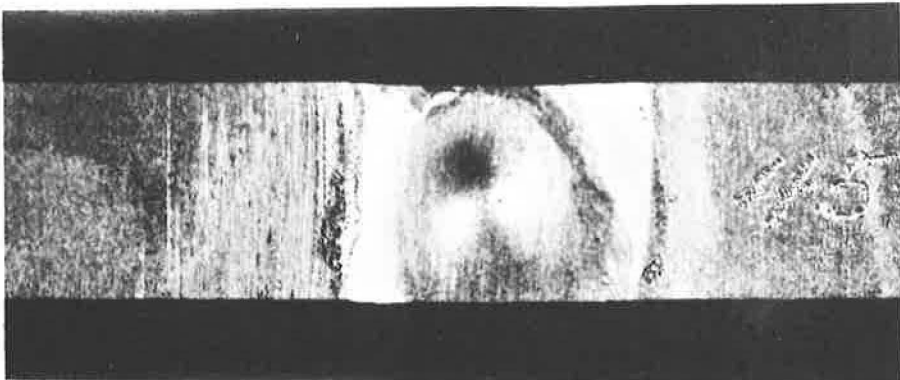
Crater on root pass of TIG butt weld in 2219-T87 plate (S-278457, mag. 2X).
